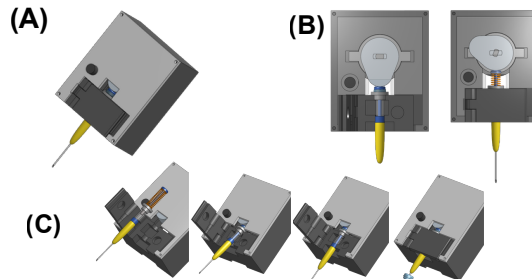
(A) Housing for fluid draw, (B) Cam in loaded and unloaded position, (C) Loading process for cartridge
